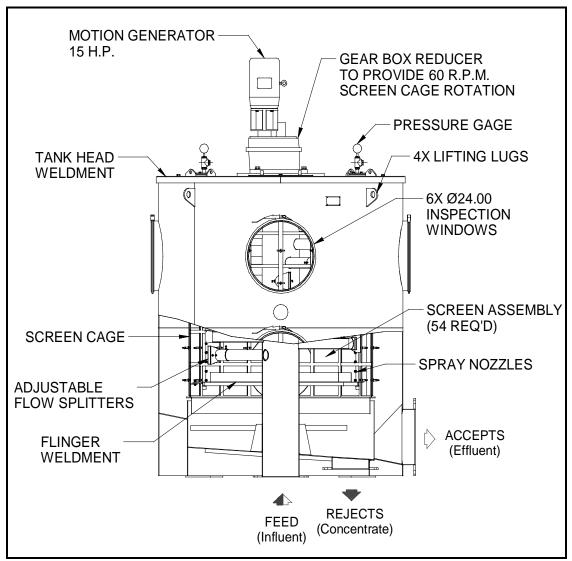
Machine Overview (WWF60-5L and WWF60-6L)
